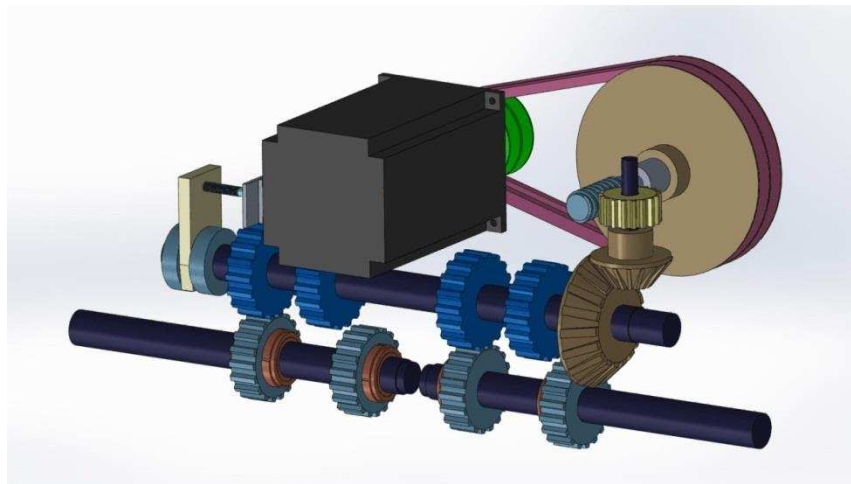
FIG: SCHEMATIC DIAGRAM OF GEARBOX
